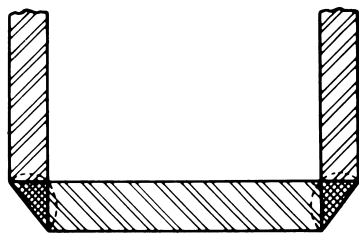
PROHIBITED WELDED JOINT
